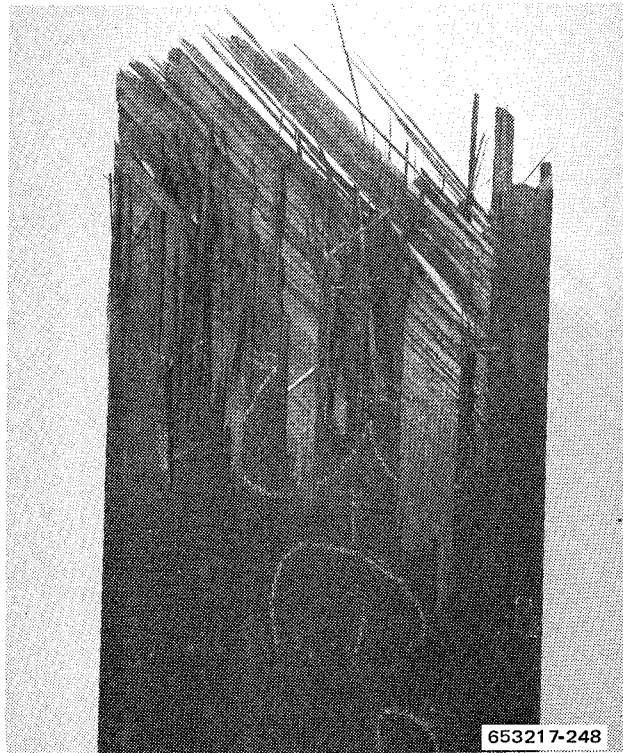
G/E Long-Term Specimen BC91-5 Showing Fracture Appearance After Failure in 2669-hr
